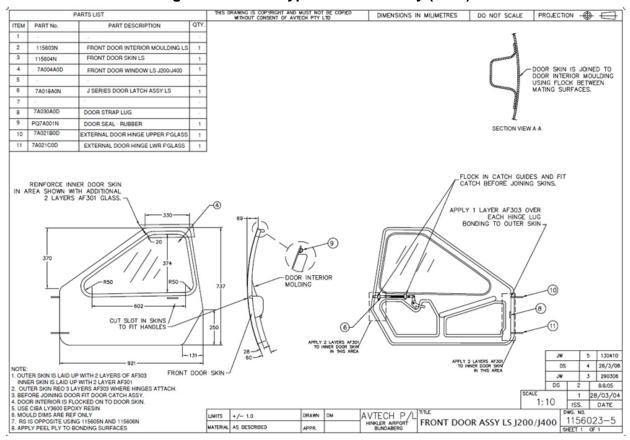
J200-Type Door Assembly, J160-Type (J200/J400)
